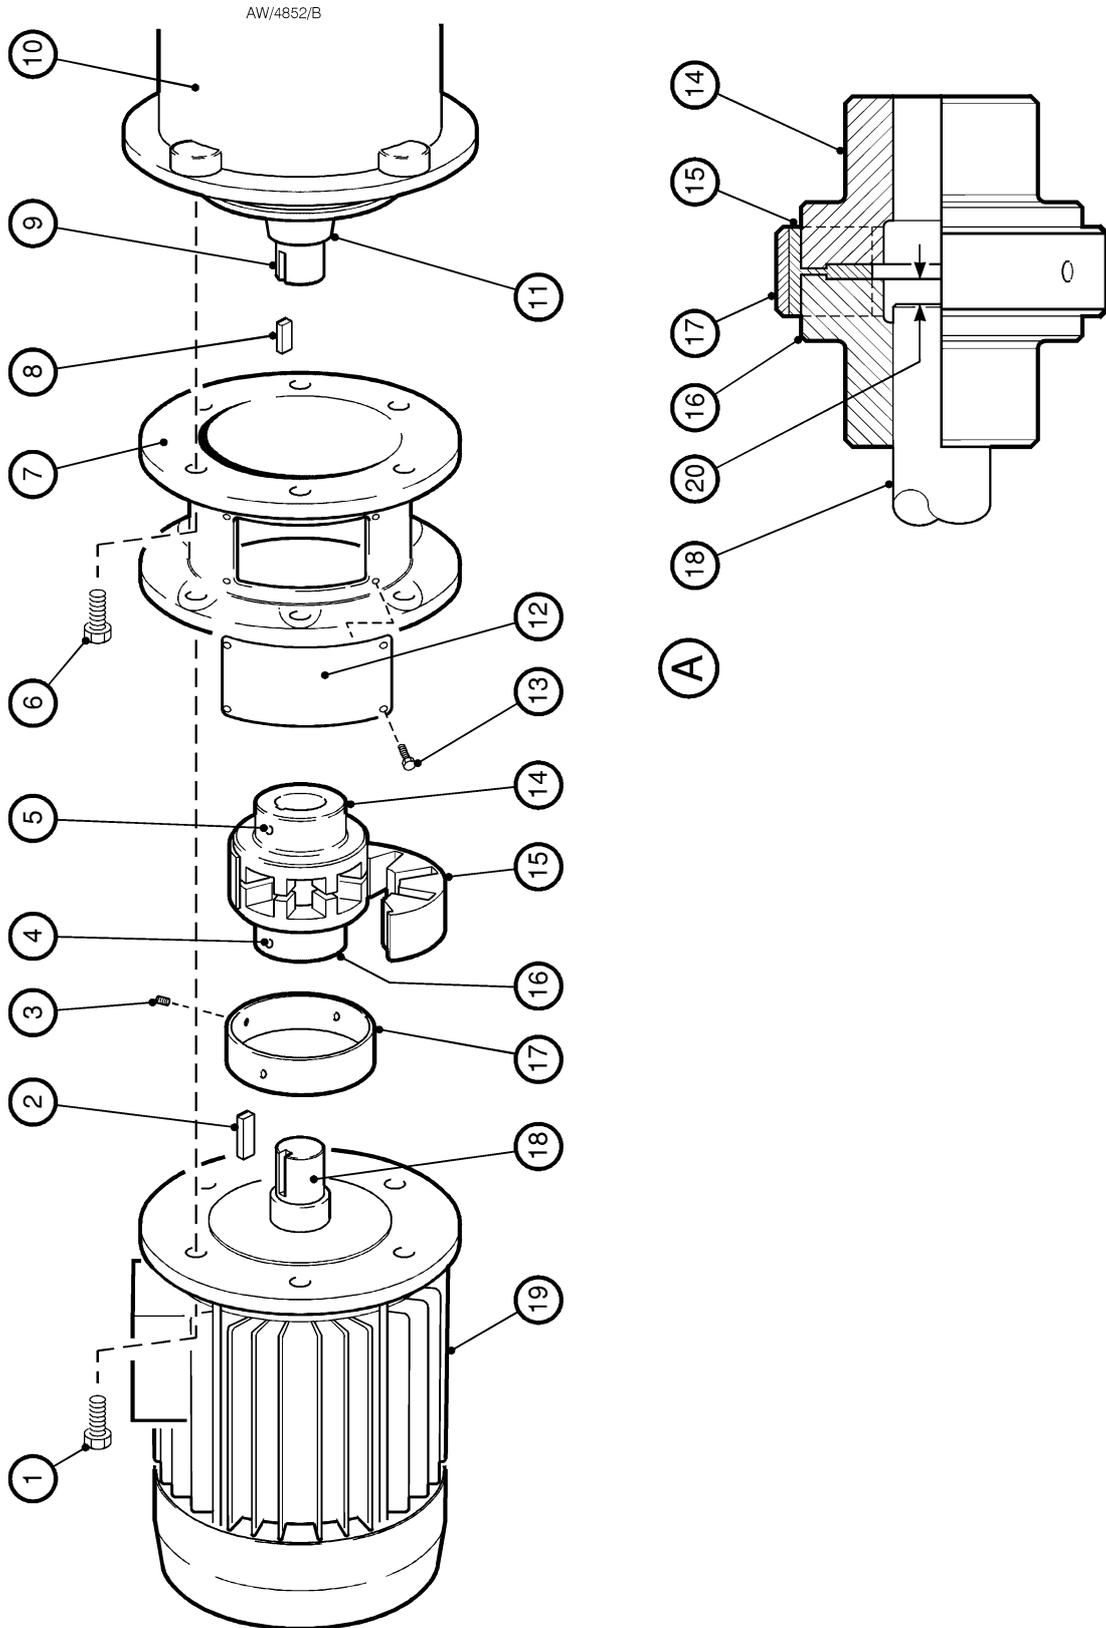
Exploded View of Pump Motor, Coupling Drive and Coupling Housing - Key
